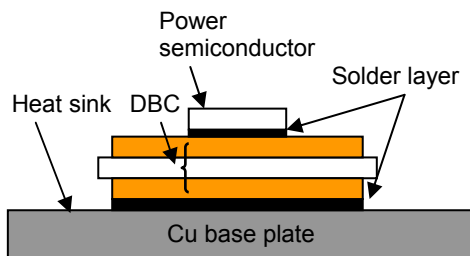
Principle thermal stack with semiconductor, solder layers, DBC and heat sink
